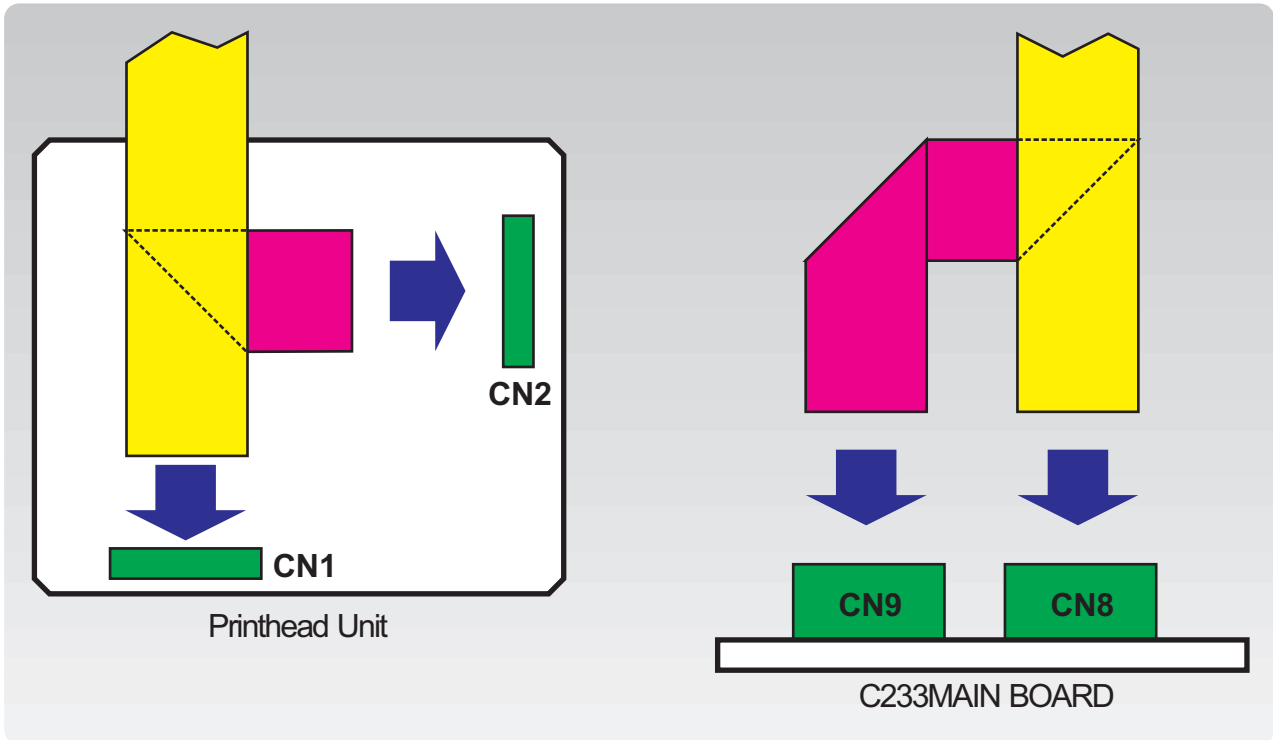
Cable Connection between Printhead and C233MAIN Board
